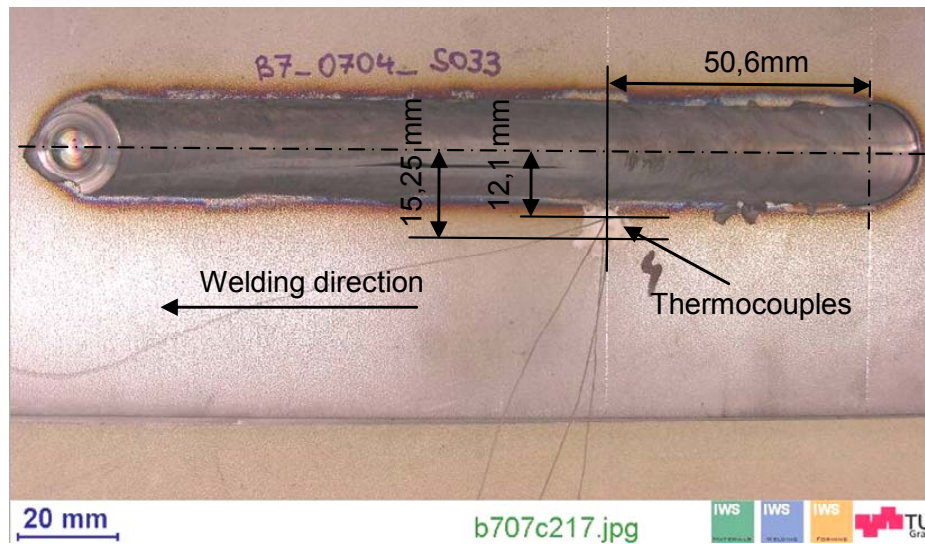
Thermocouples on the advancing side placed 12.1 mm and 15.25 mm away from the weld center
